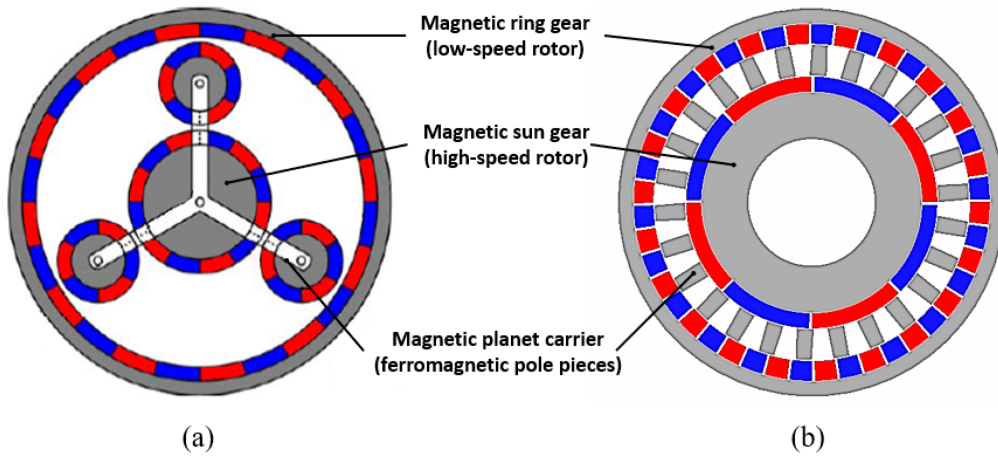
Examples of planetary magnetic gears: with multiple planets (a) and with just the carrier (b). [15]
